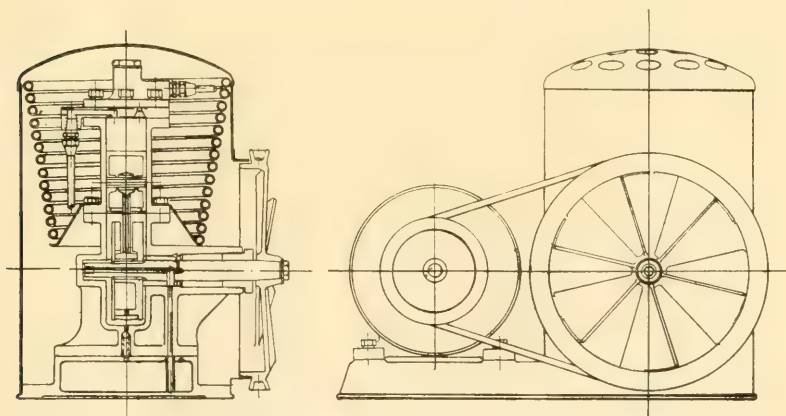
KOLD KING REFRIGERATING MACHINE.
